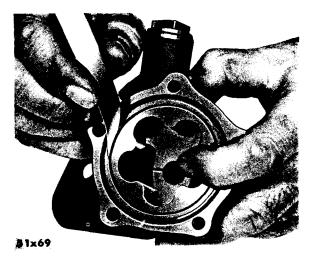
Measuring Clearance Between Rotor Body and Pump Body
